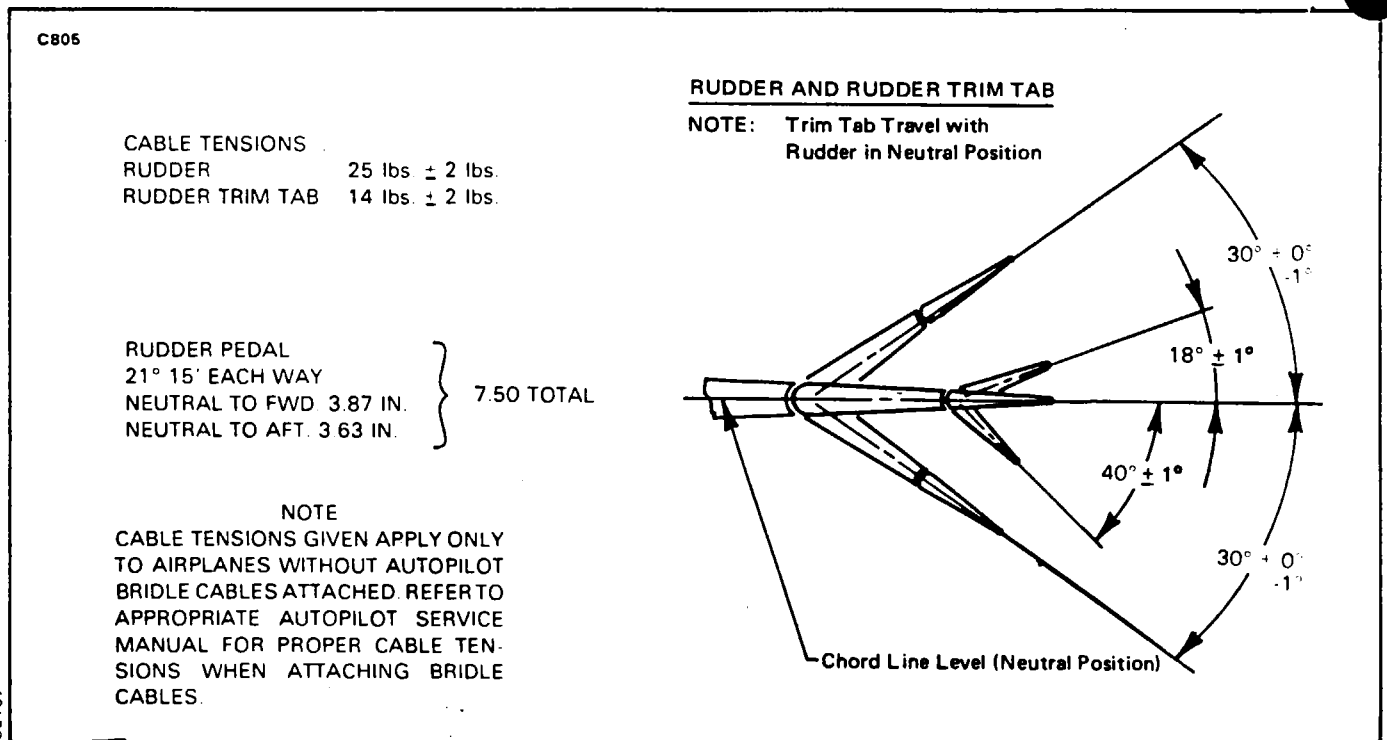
Rudder and Trim Tab Control Travels and Cable Tensions
